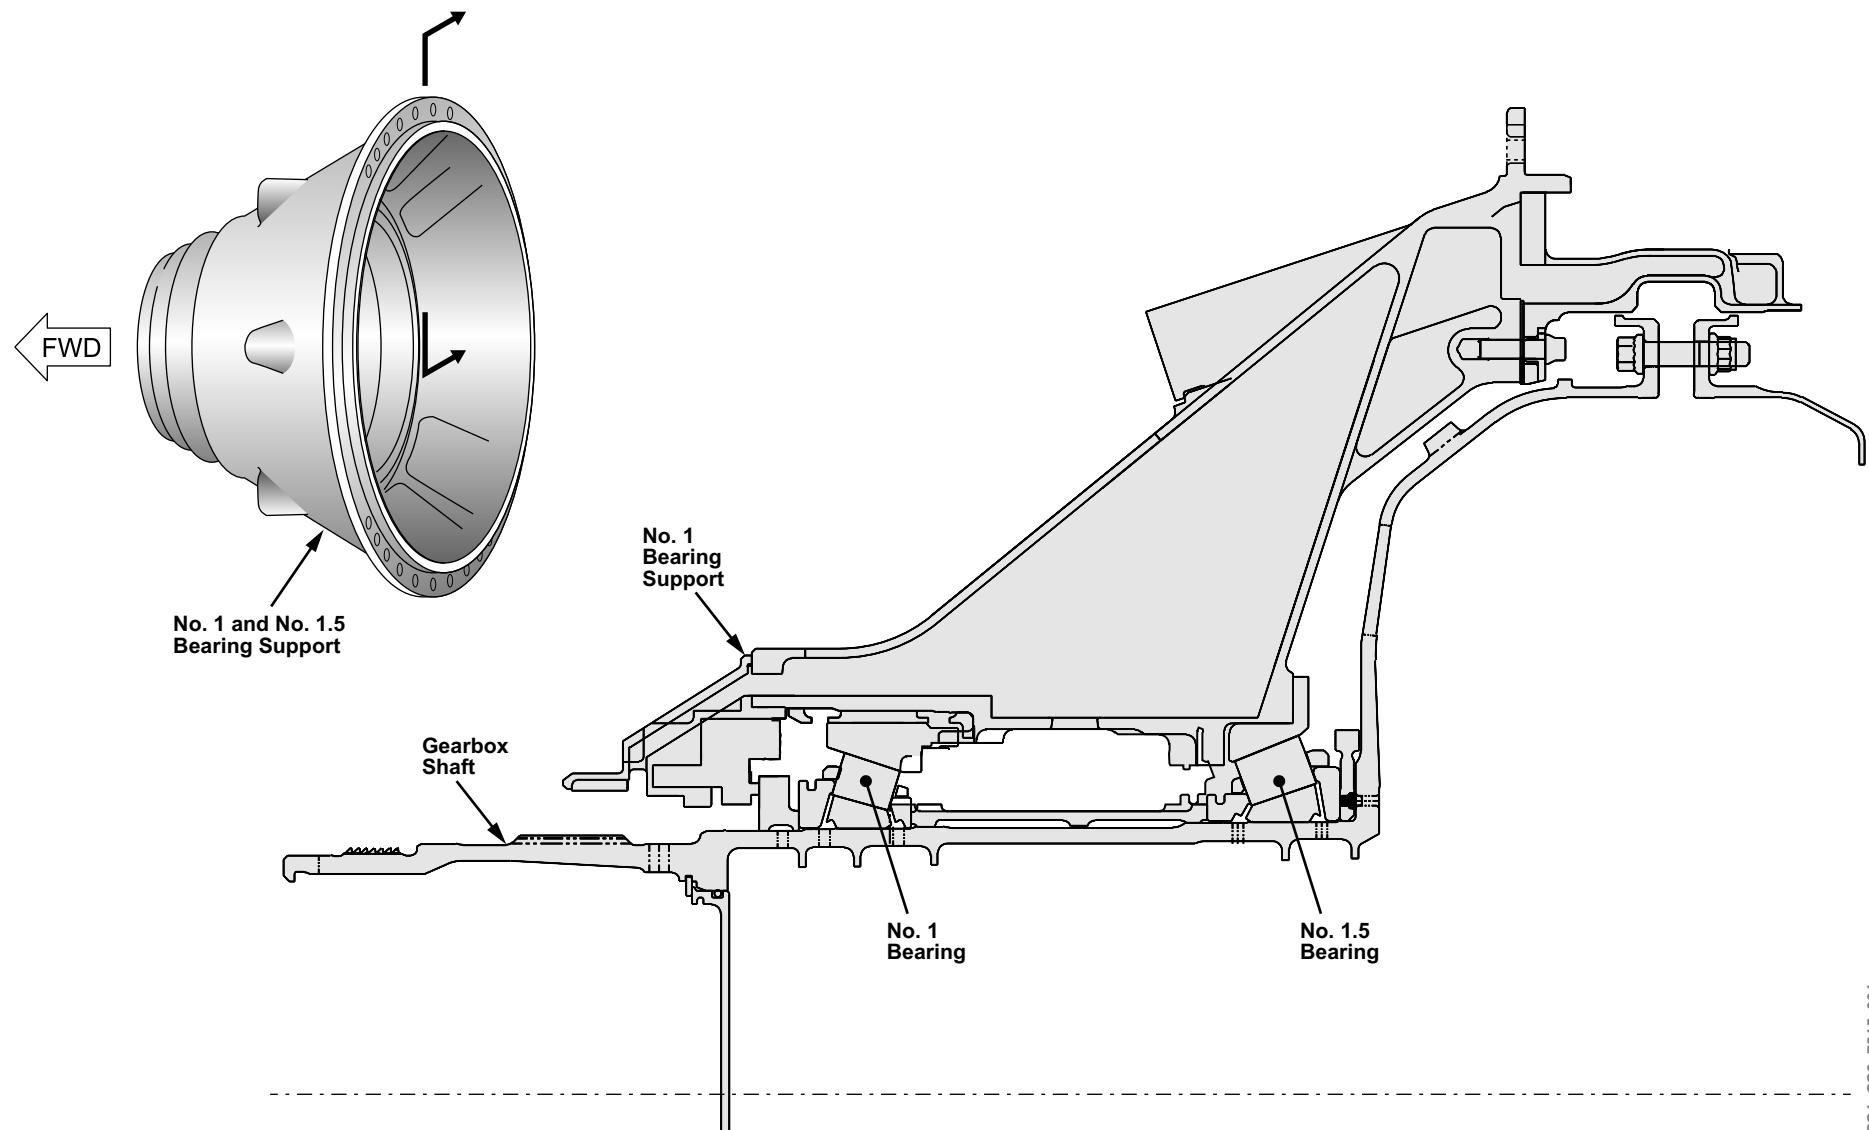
No. 1 and No. 1.5 Bearing Support Assembly and Cross-Section
